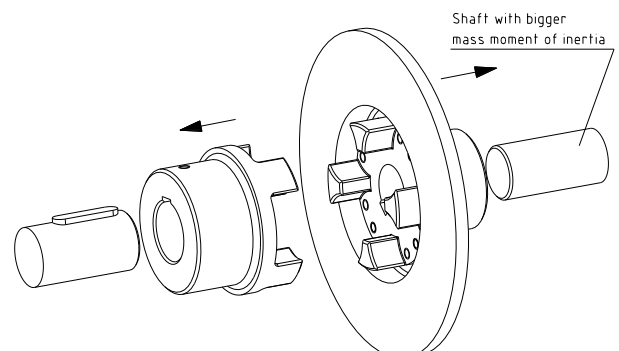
Assembly of hub and FN hub with brake drum/disk
